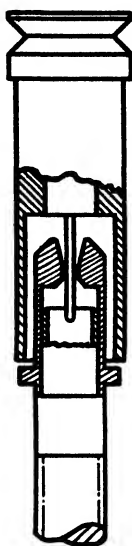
(a).—Top bearing in Ferranti single-phase meter.
